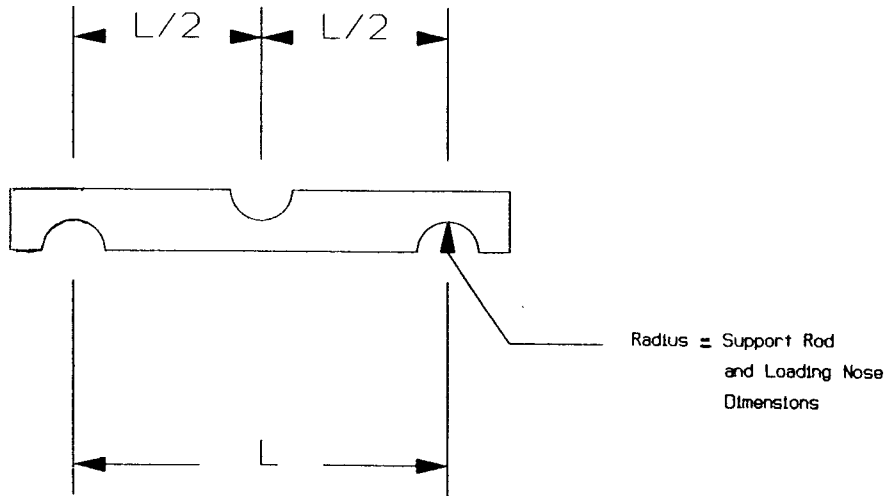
Fixture Used to Set Loading Nose and Support Spacing and Alignment
